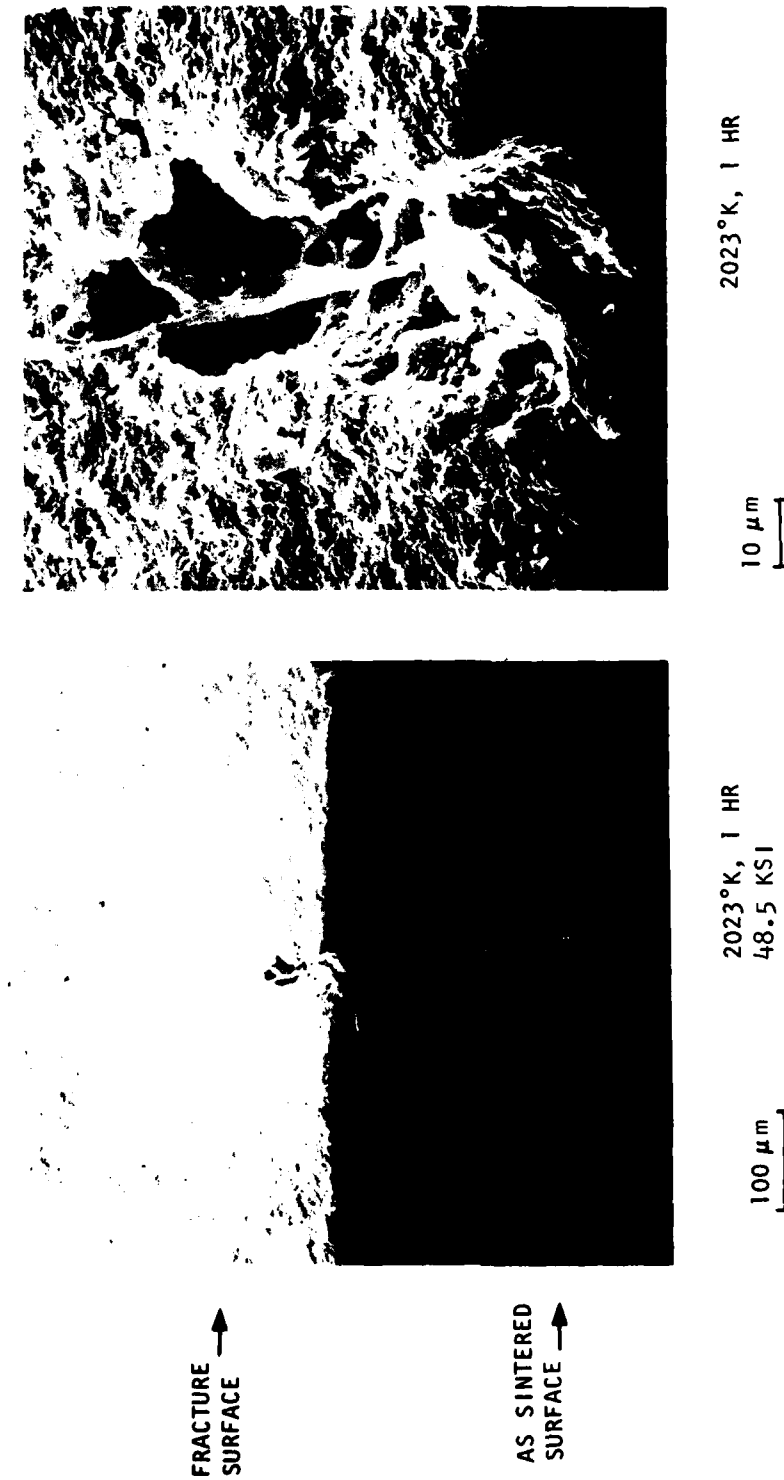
Large Defect on Tensile Surface of Sintered MOR Specimen
